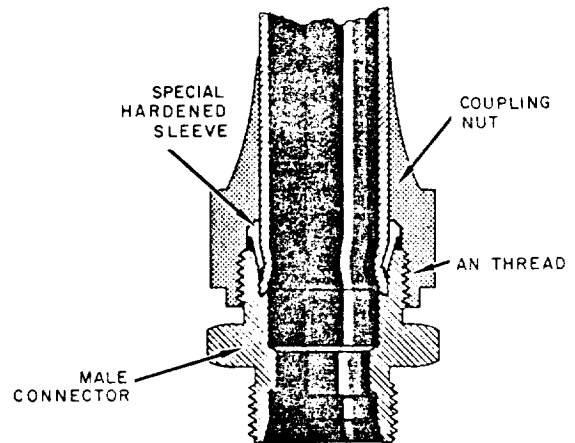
Flareless tube fitting (Ermeto) per MS33514.
